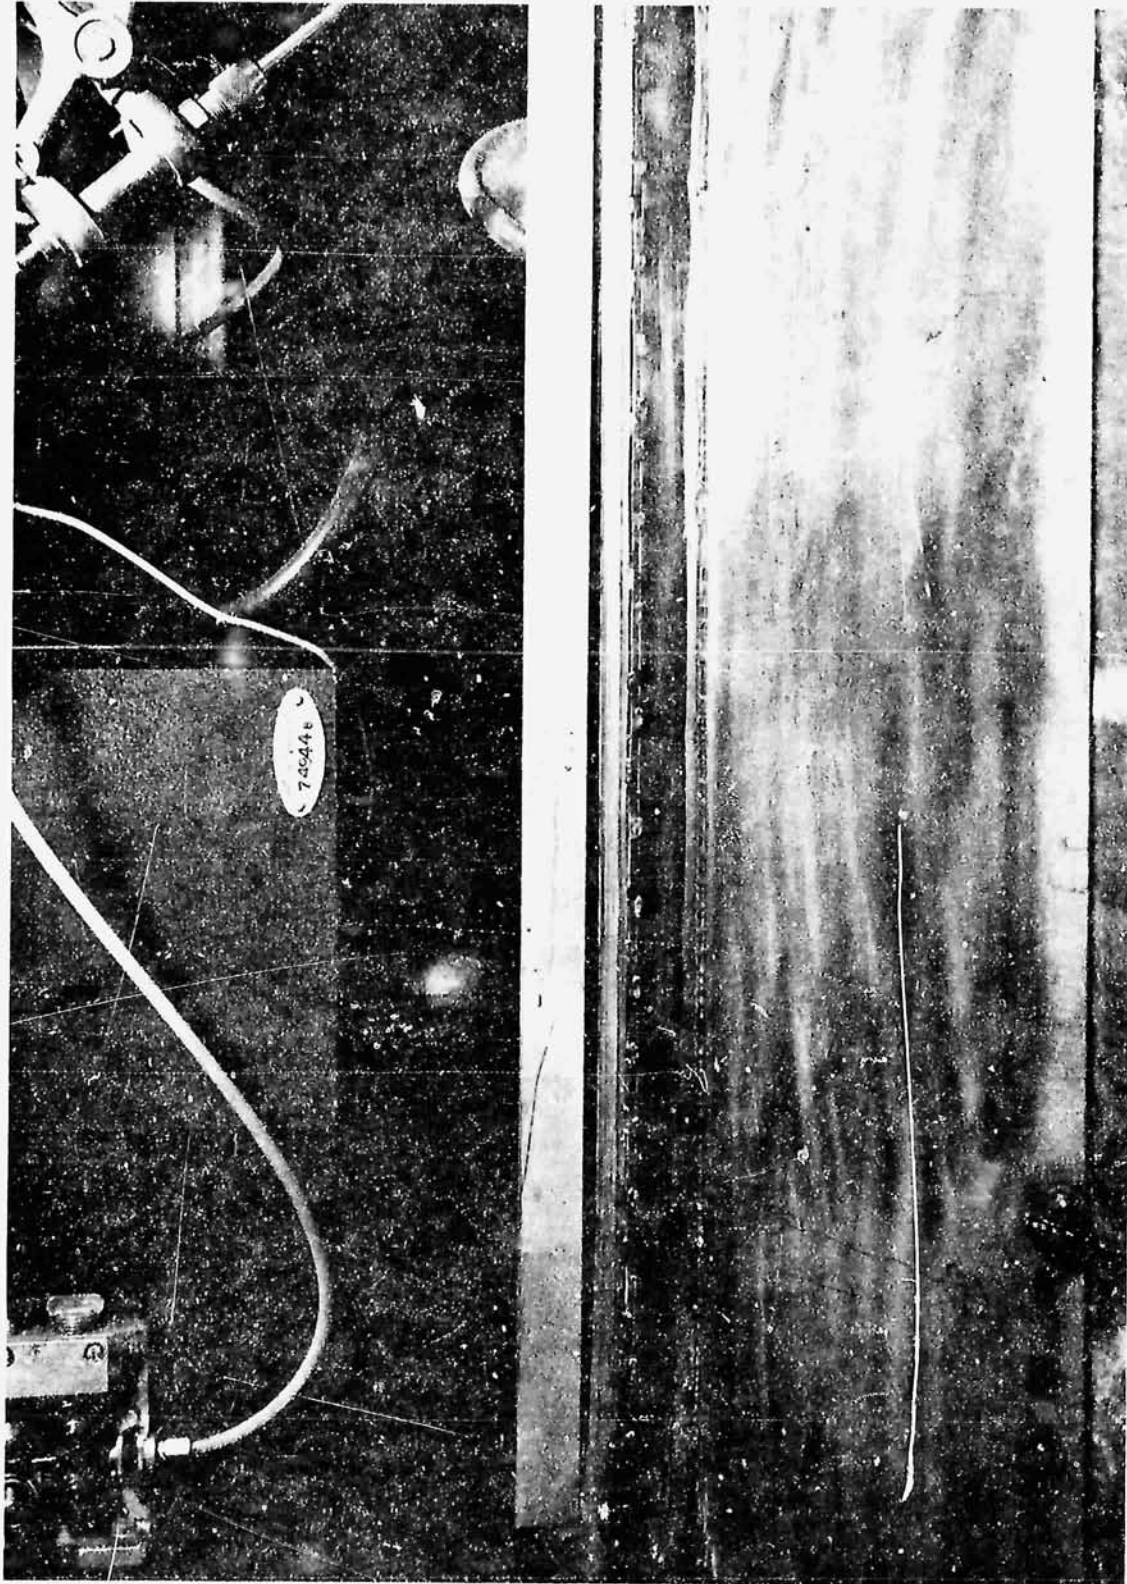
Distortion Effects Encountered with TIG Welding of AISI 347
